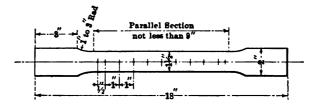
Standard test piece of 8 ins. gaged length, piece to be of same thickness as plate.
